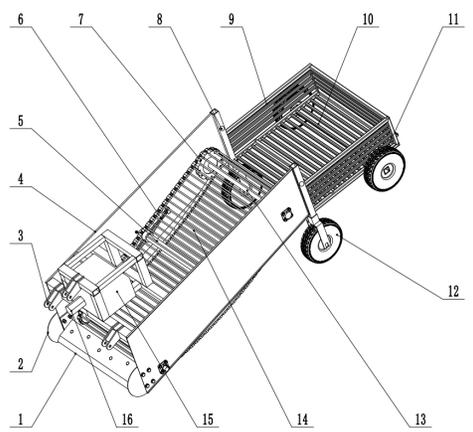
Schematic diagram of the overall structure. Note: 1. Excavation shovel; 2. Cutting disc; 3. Three-point suspension drawbar; 4. Frame; 5. Support shaft; 6. Soil shaking frame; 7. Rubber wheel; 8. Traction hole; 9. Potato collection frame; 10. Lower push-pull plate; 11. Support wheel; 12. Depth-limiting wheel; 13. Driven shaft; 14. Closed soil screening chain; 15. Gearbox; 16. spline shaft
